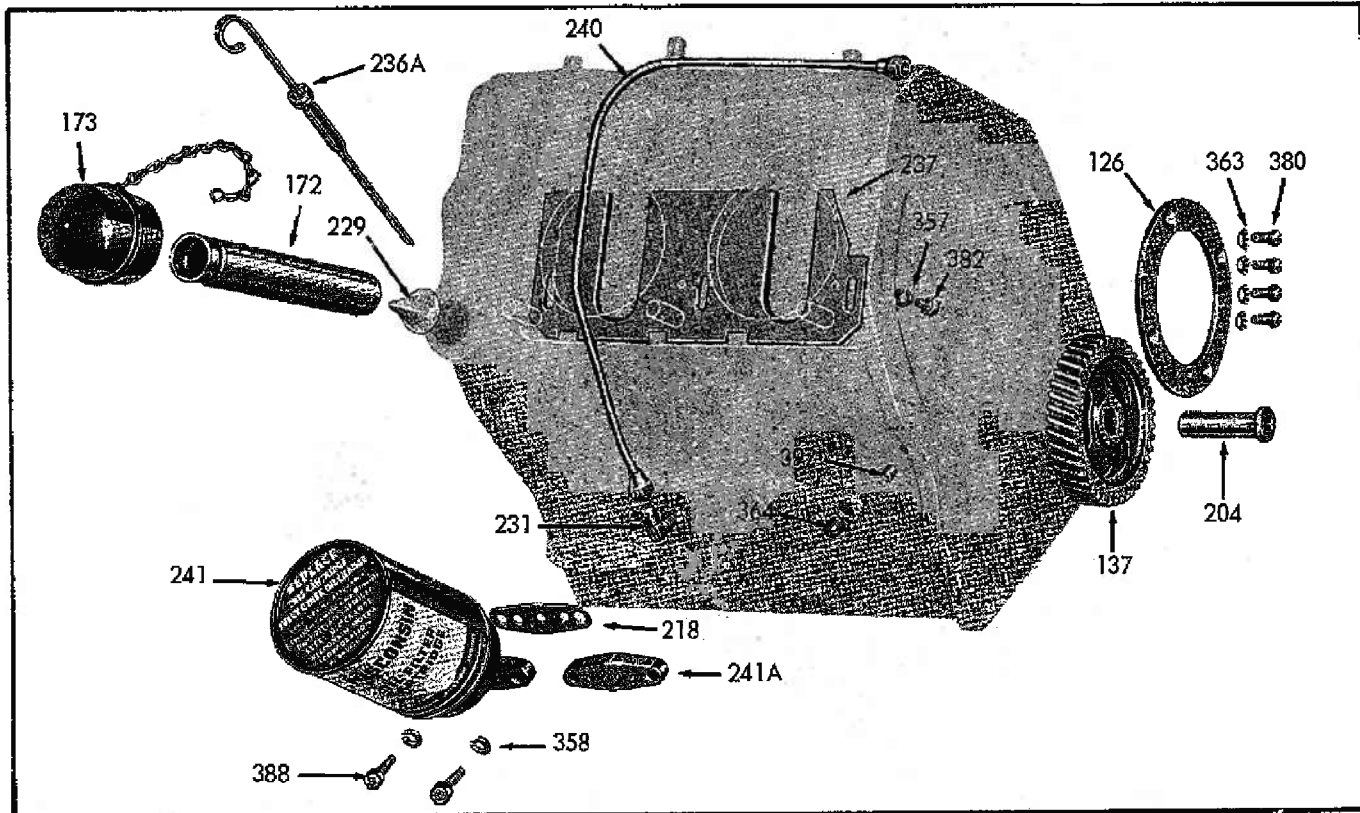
, OIL FILTER AND OIL FILLER MOUNTING GROUP
